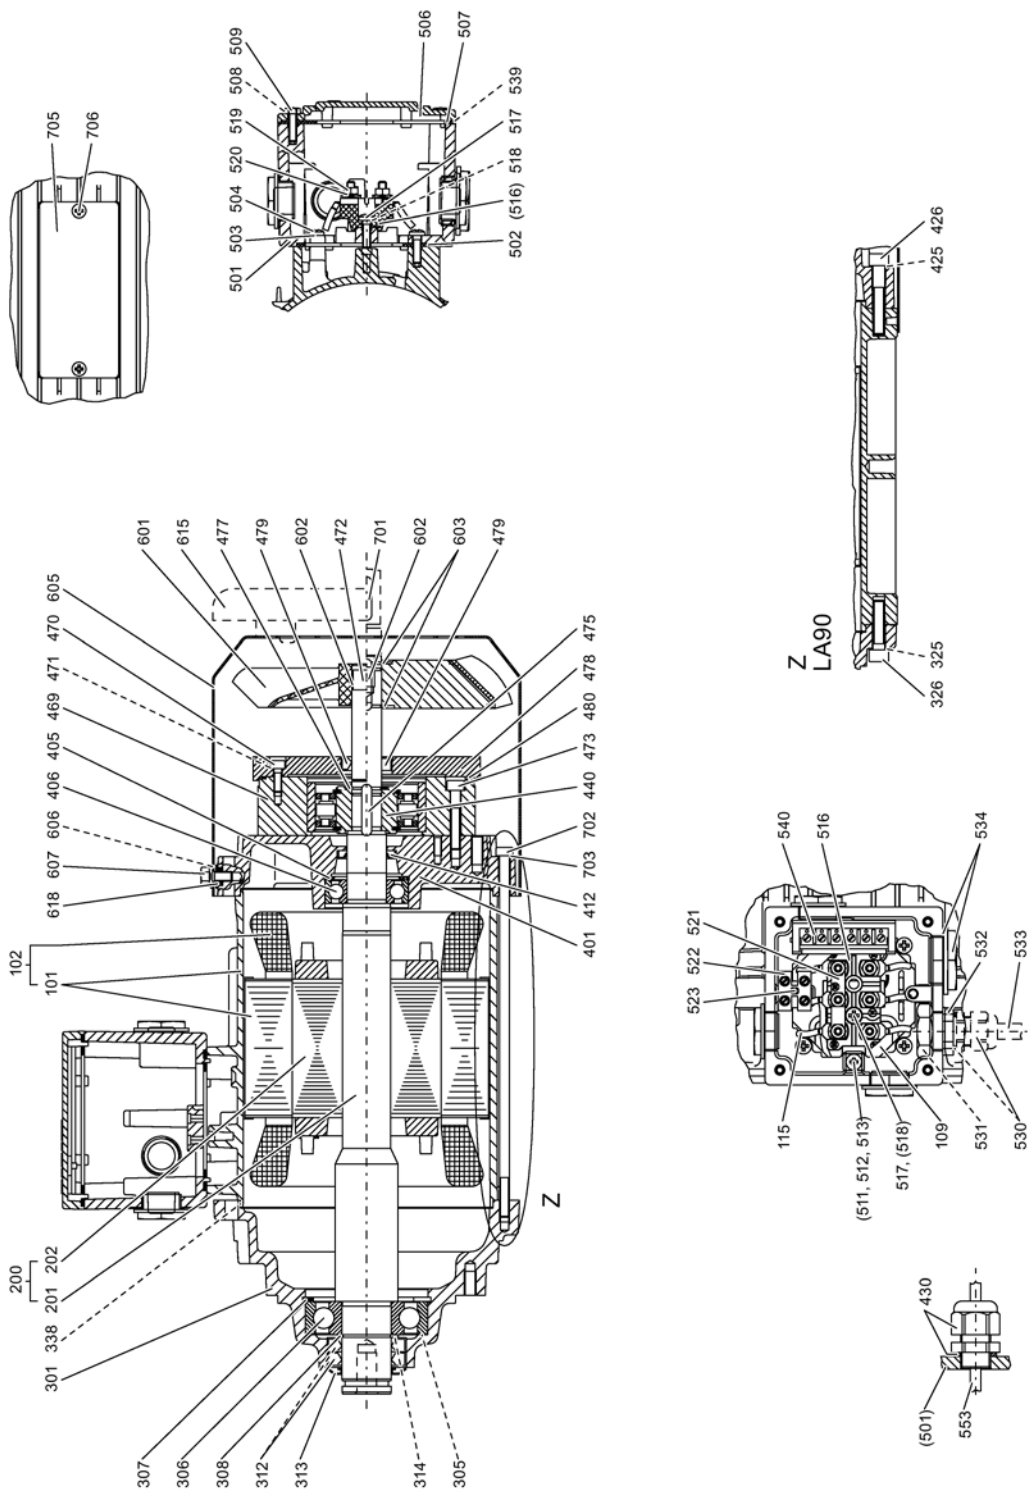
MODULOG brake motor sizes LA71 - LA90 with backstop
